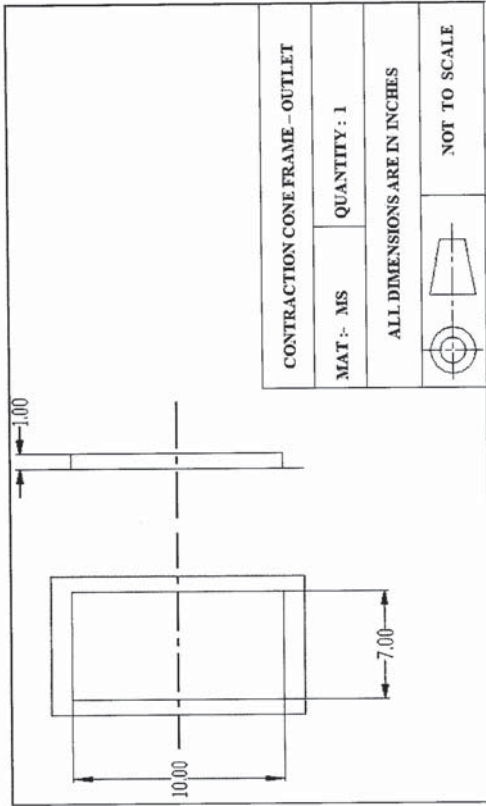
CAD DRAWING OF CONTRACTION CONE FRAME - OUTLET
